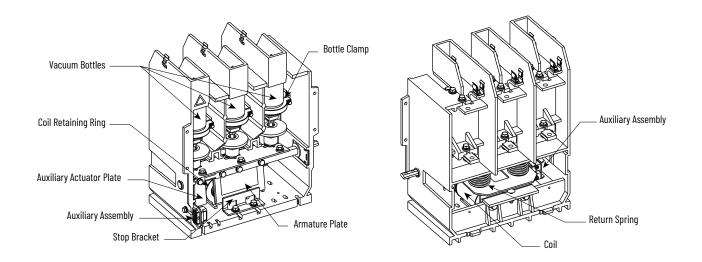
Bulletin 1502, 450 A Mechanical Latch Assembly
